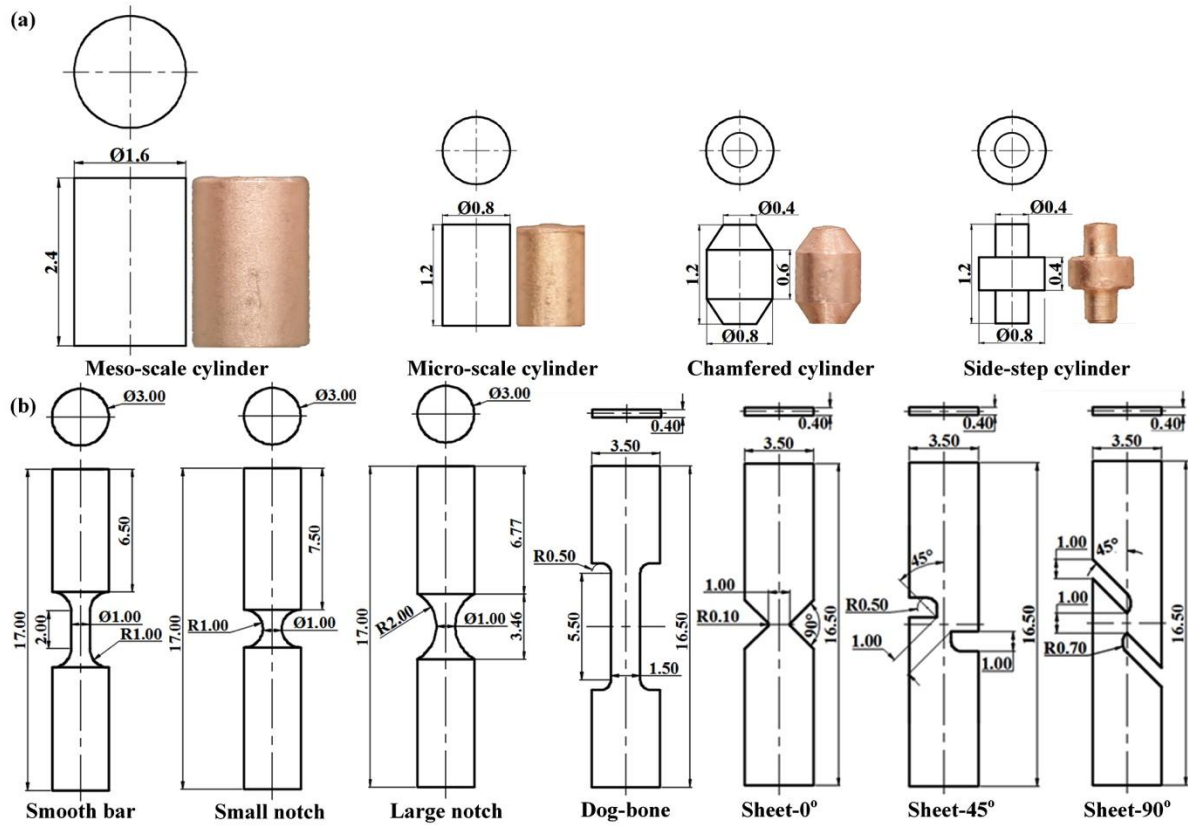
Specimen designs. (a) Compression; (b) Tension and shear samples (Dimensions in mm).
